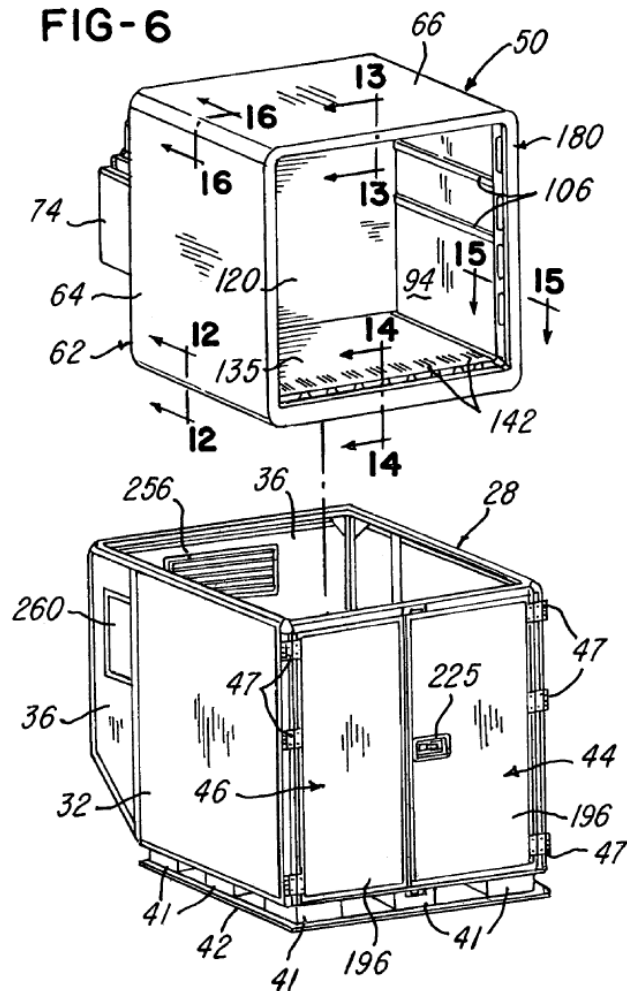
“is an exploded perspective view of the shell sub-assembly before being inserted into the outer housing assembly.” Ex. 1001, 2:53–55.
